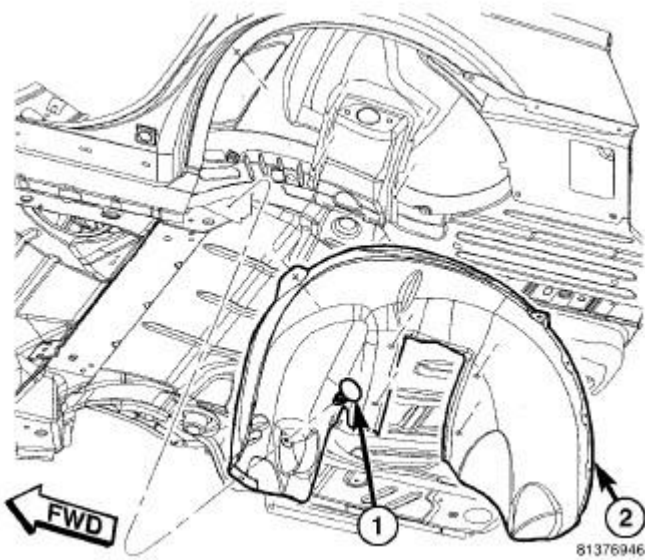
Removing/Installing Rear Wheelhouse Splash Shield
